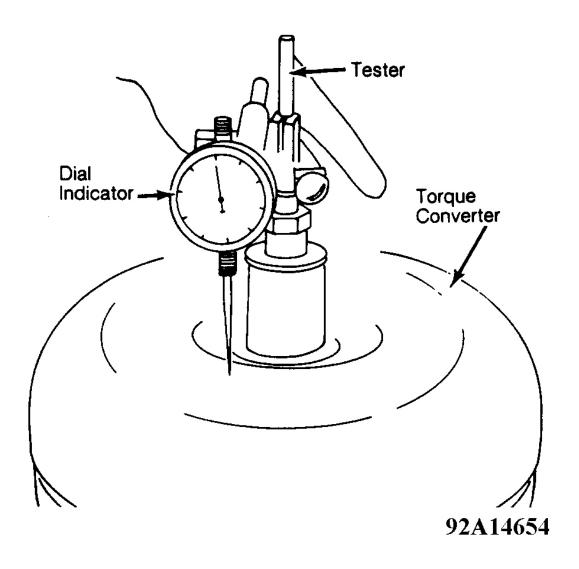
Checking Torque Converter End Play Courtesy of FORD MOTOR CO.
